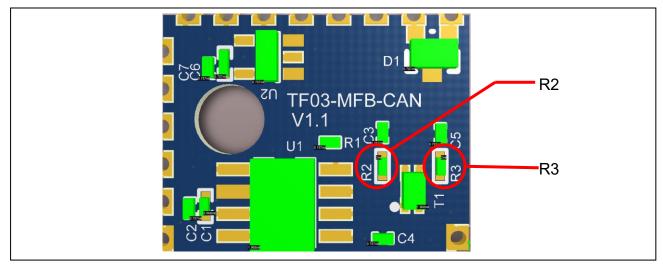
Resistances needed to be removed from PCBA for CAN Bus
